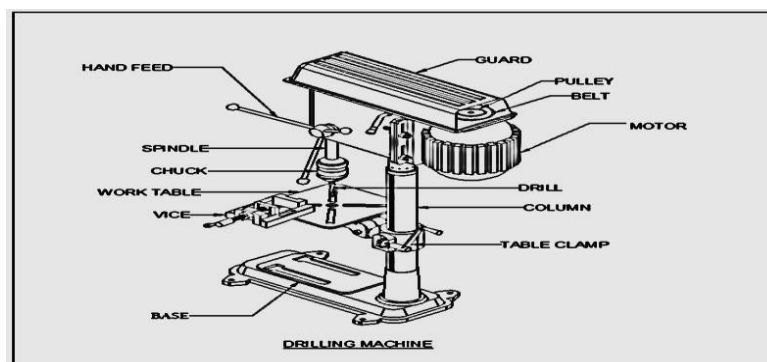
Schematic diagram of Electric Motor Drilling Machine
